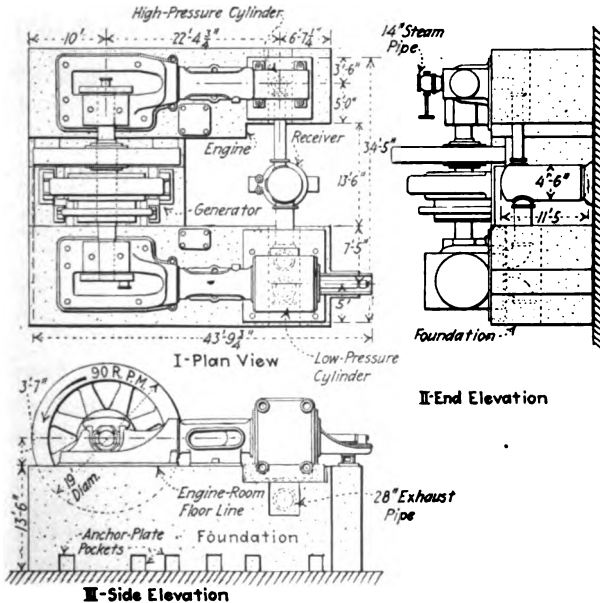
Assembly drawing of a cross-compound Fulton-Corliiss steam engine. The cylinders are 36 and 76 in. in diameter. The stroke is 54 in.
